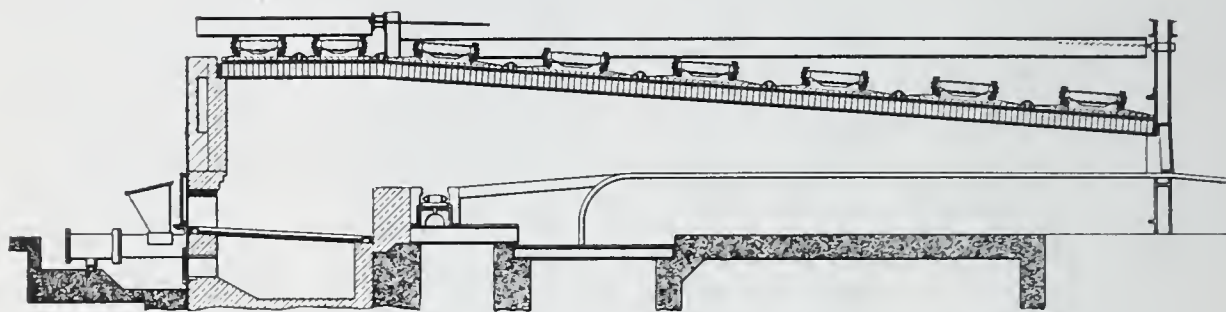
Suspended Arch in Connection with Stoker-Fired, Continuous Heating Furnace.
